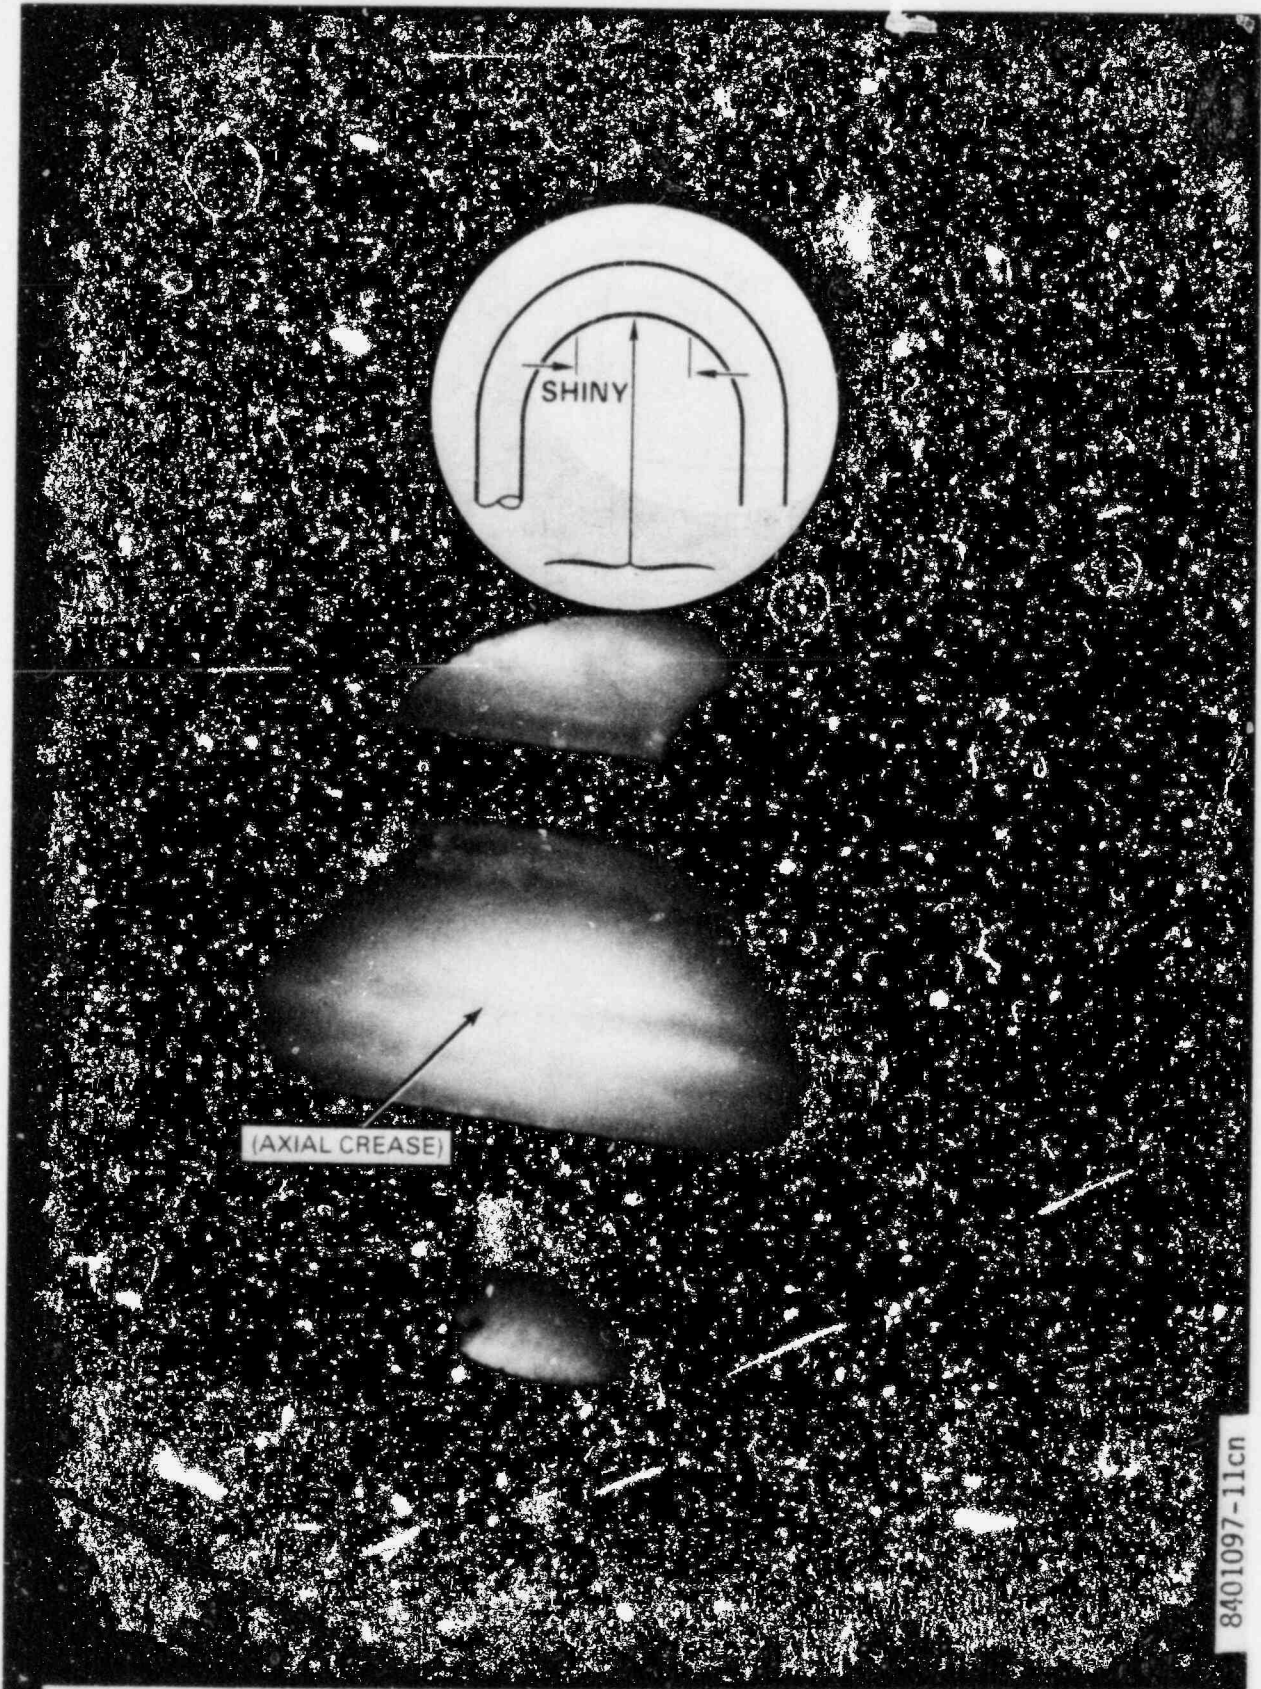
Multiple Tube Failure Conditions: Flap-Type Crack in Column 84, Intrados and Extrados Cracks in Column 85 and a Crease in Column 86
